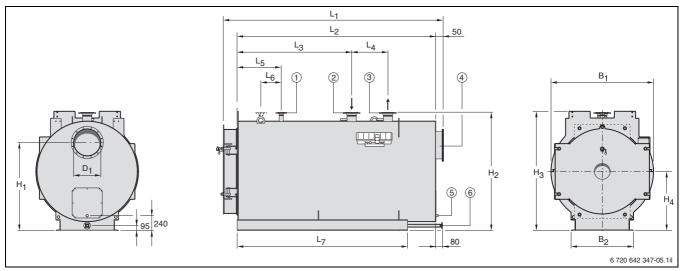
Dimensions Logano S825L, boiler sizes 6500 to 19200 (dim. in mm)
